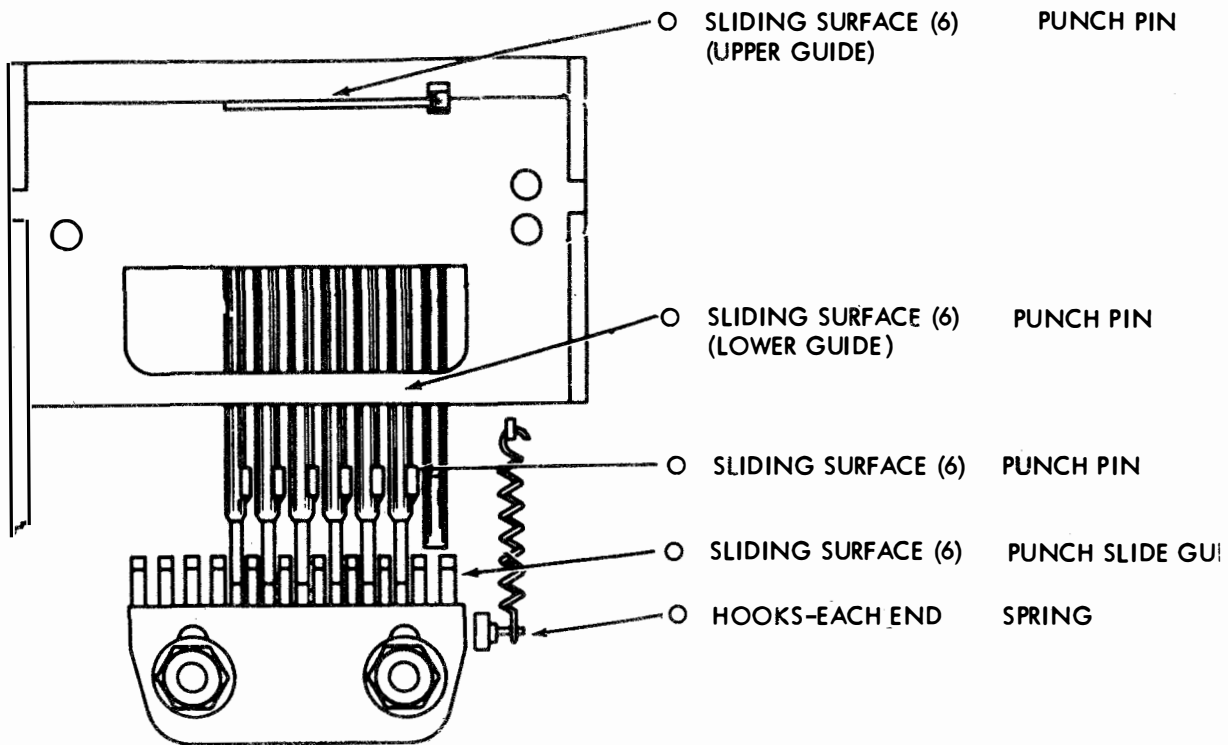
Perforator Mechanism for Fully Perforated Tape
